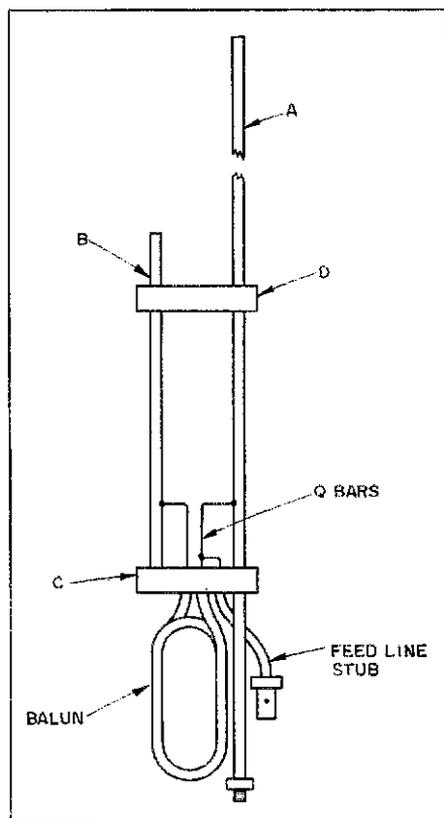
An overall view of the J antenna, showing the component parts. Dimensions are given in the text.
